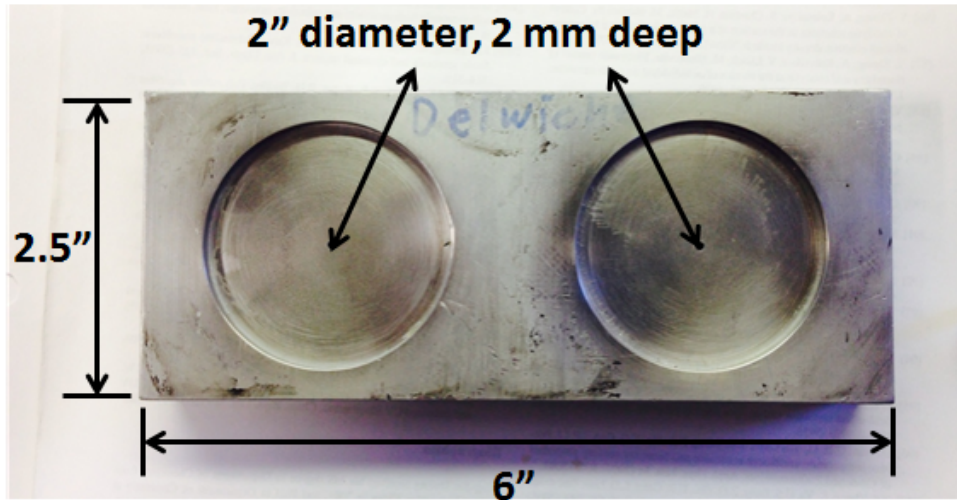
Aluminum Mold Used For Epoxy Based Samples
